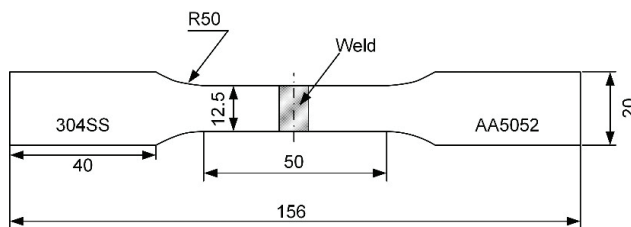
Dimensions of fatigue specimens for butt joints (unit: mm).
